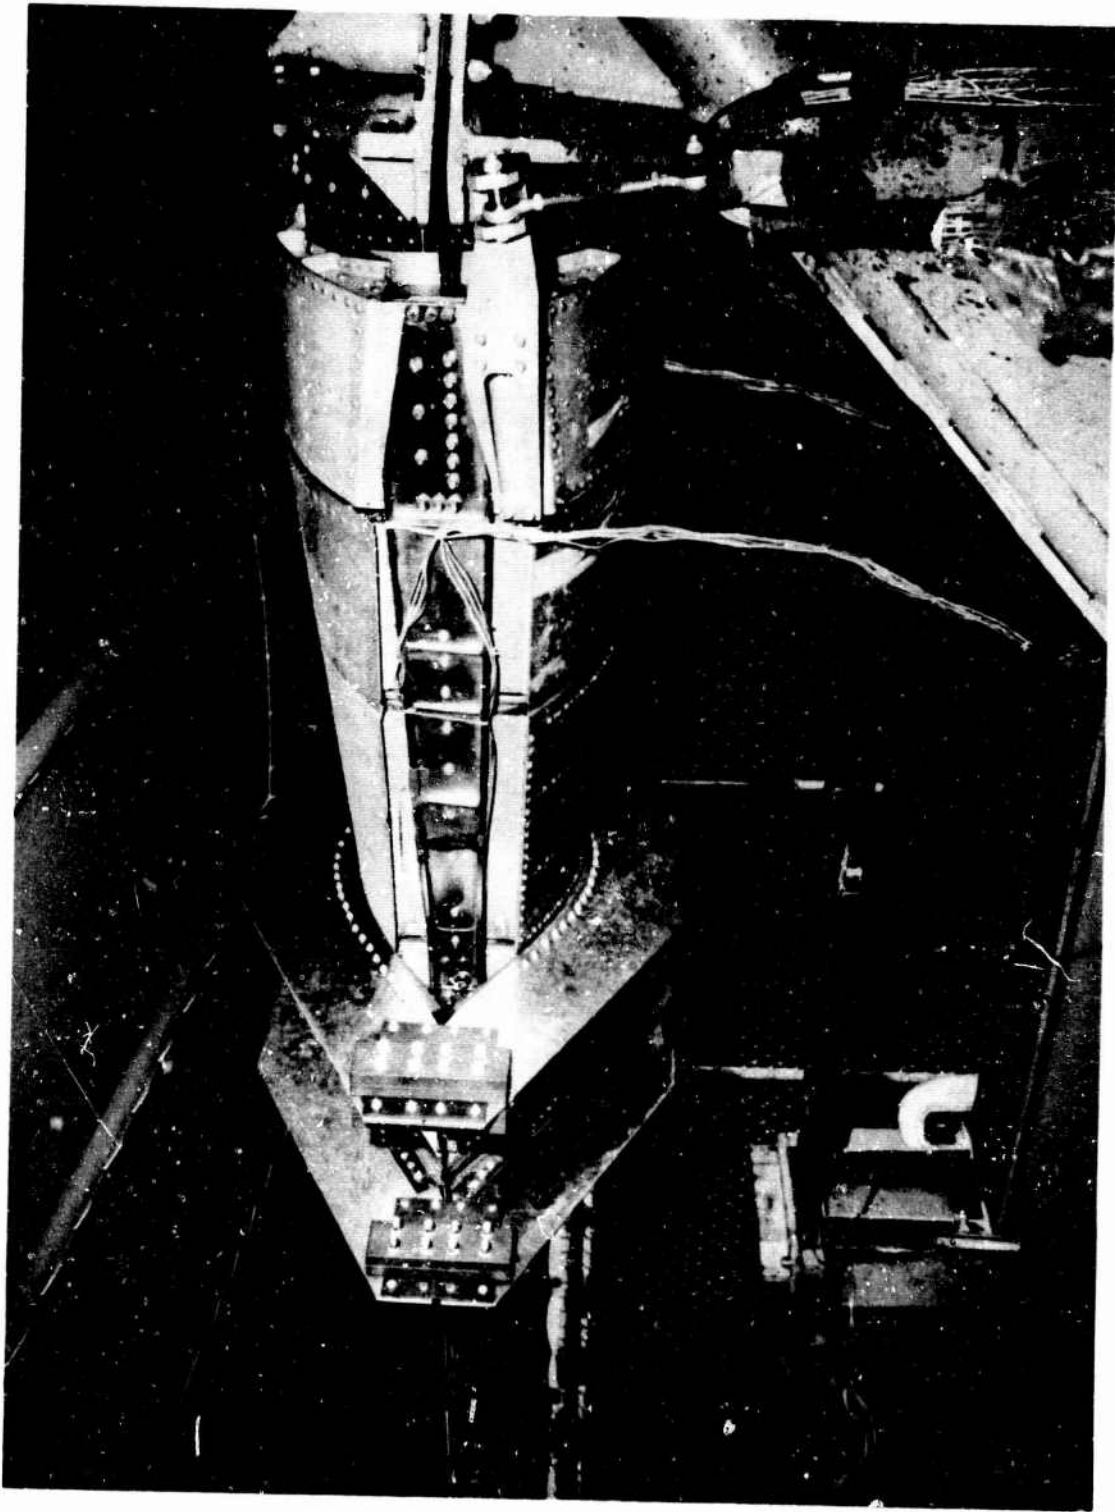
Blade Root-End Fatigue Test Fixture - Leading Edge of Specimen.
